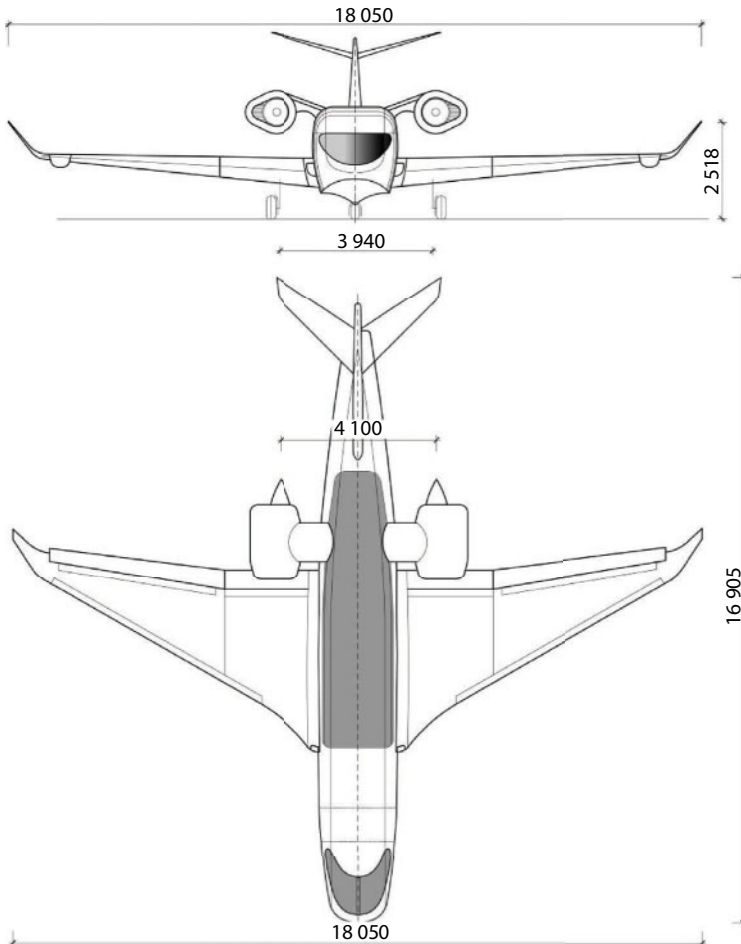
Front view and top view of amphibious aircraft prototype.
